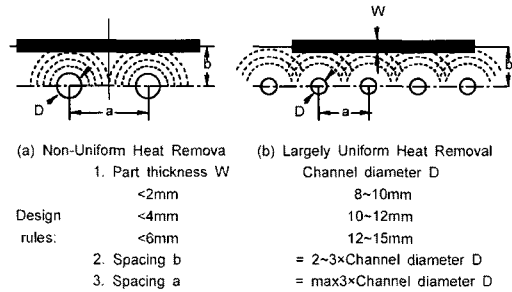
Conventional design guide for cooling channel in injection molding [6]
